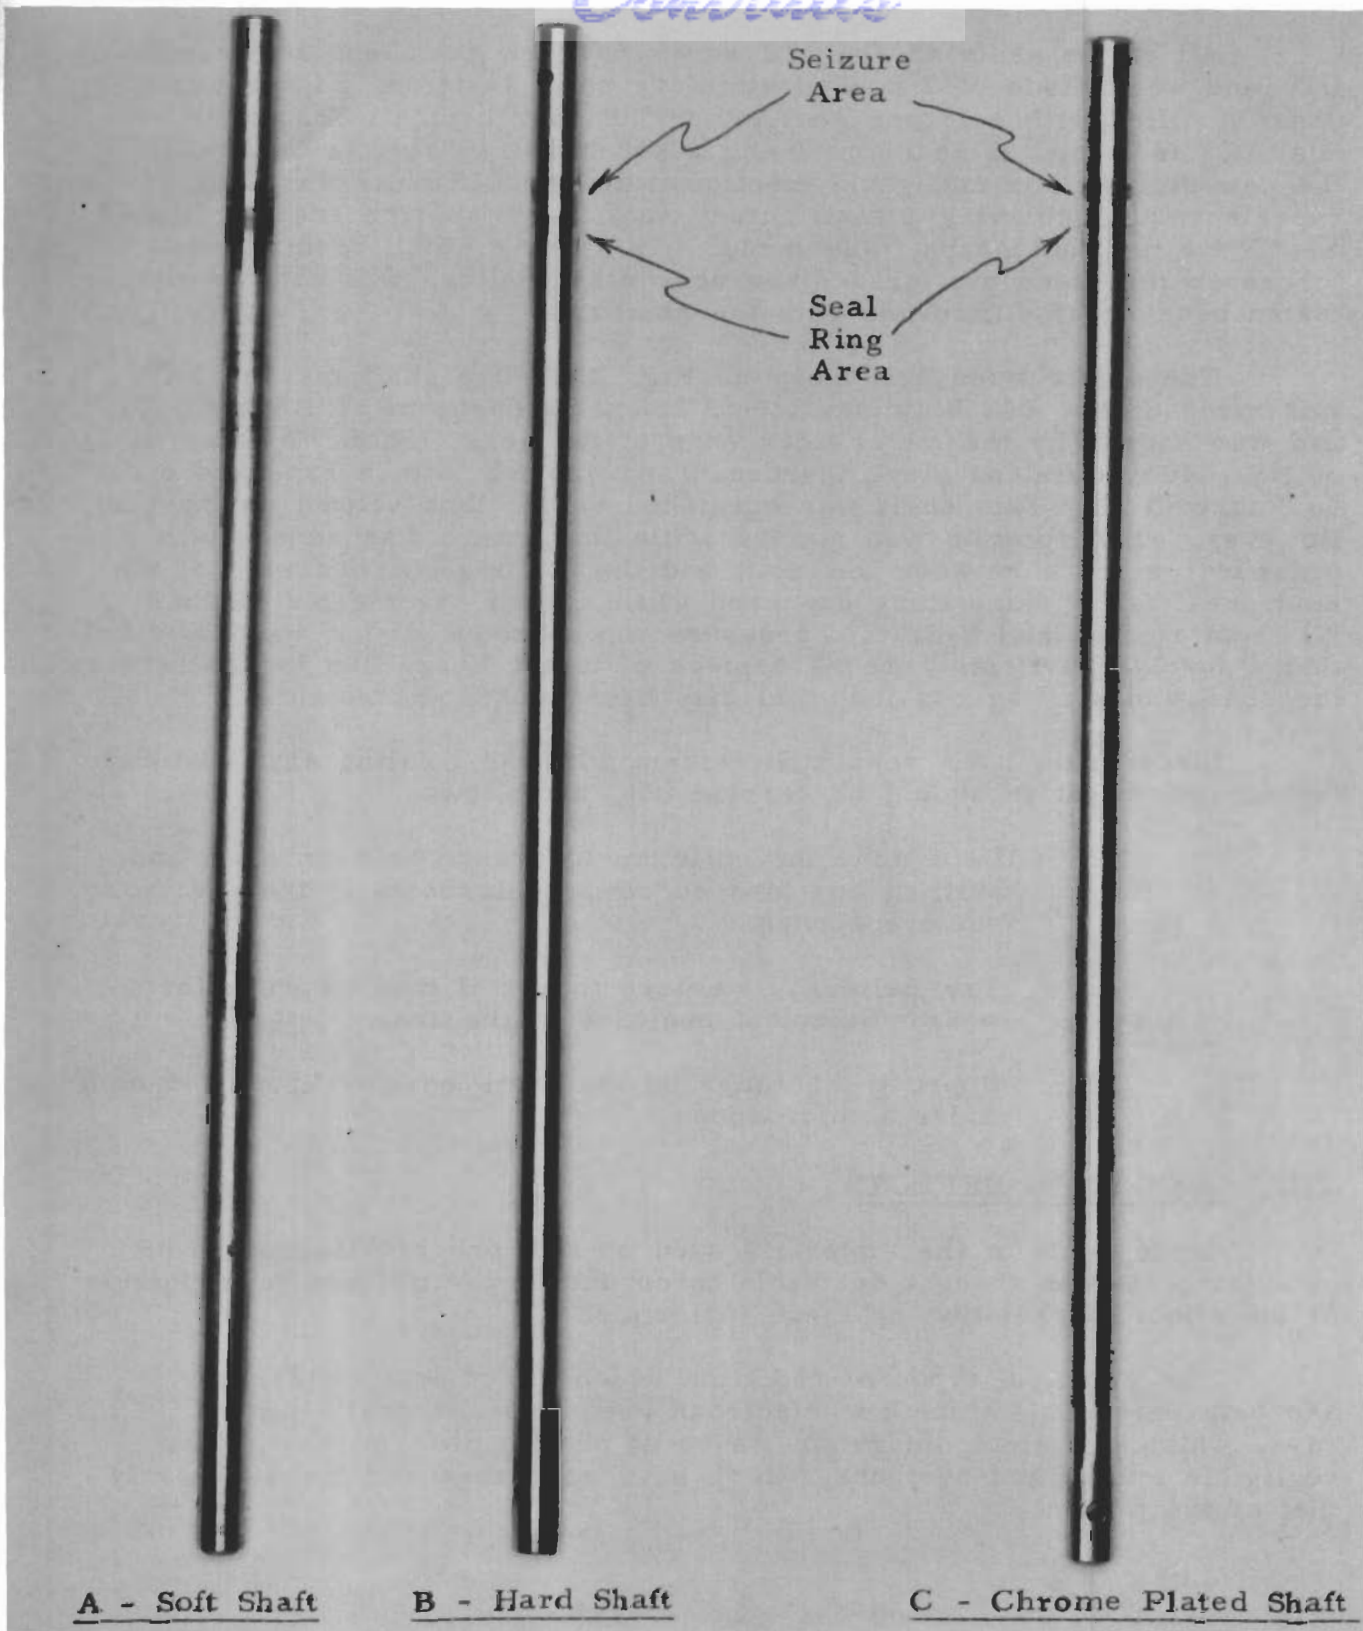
SHAFTS USED WITH ROTATING SHAFT FIXTURE
